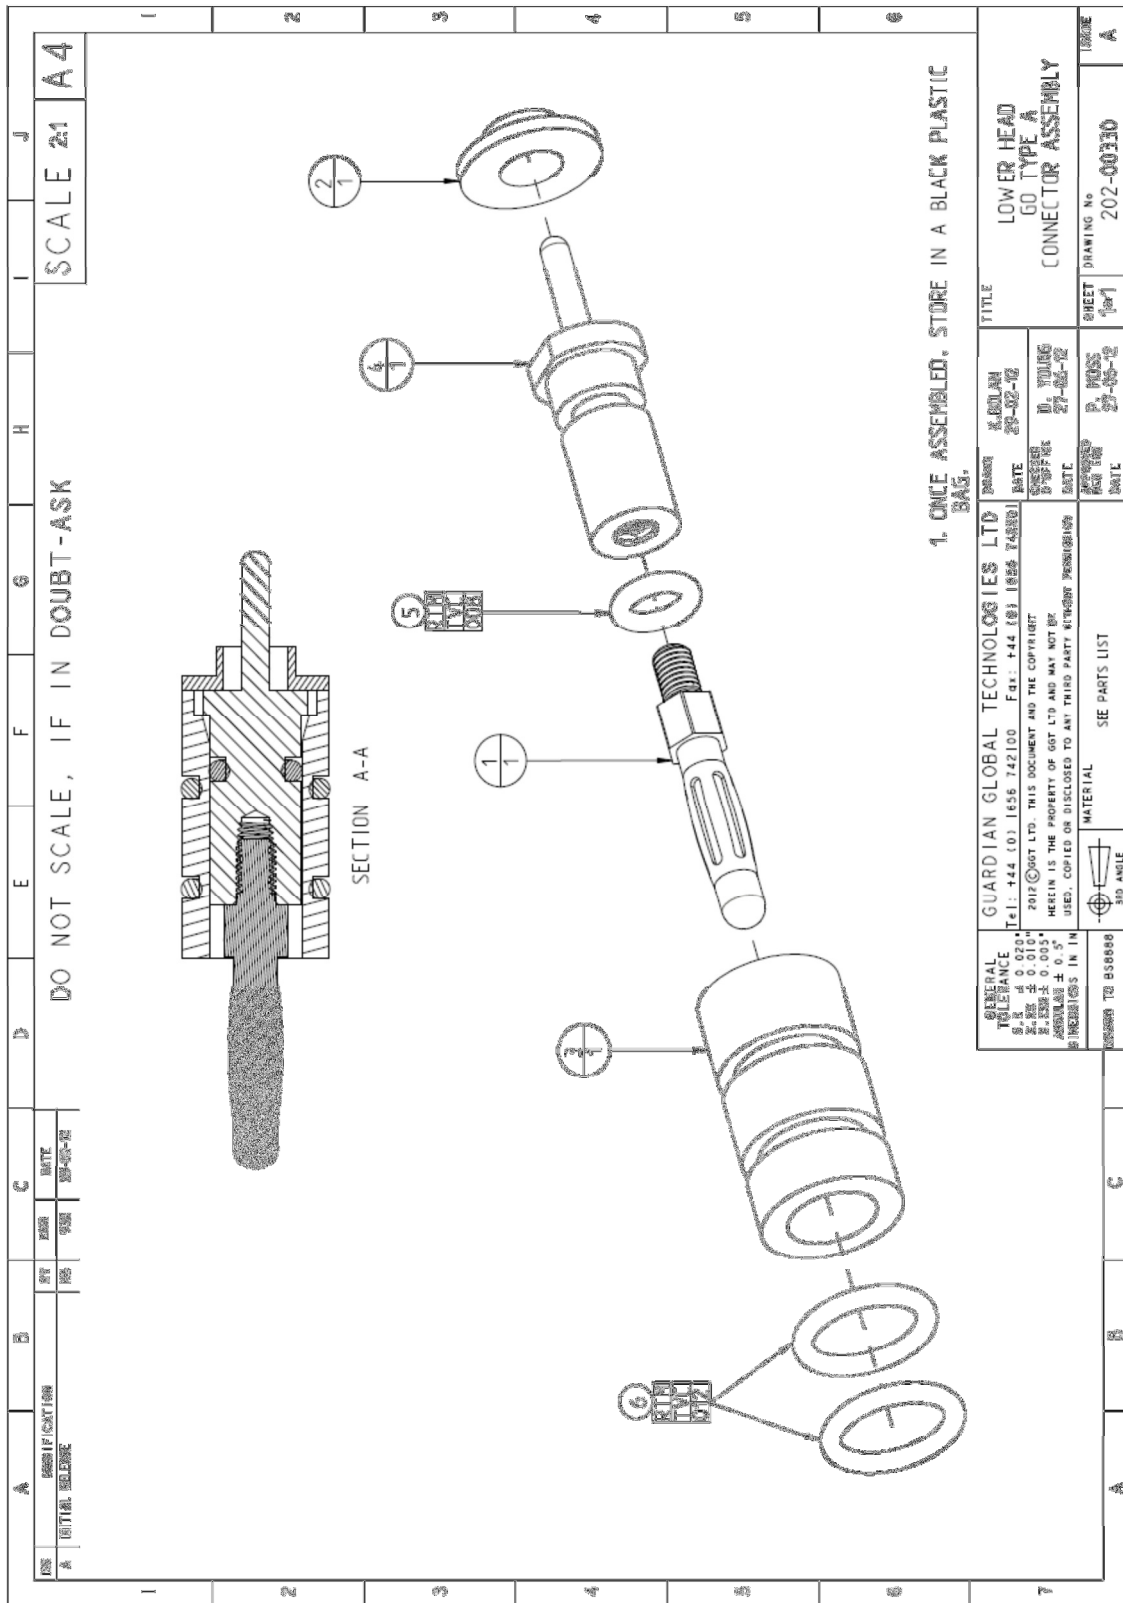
Lower Head GO Type A Connector Assembly Drawing, 202-00330-A
